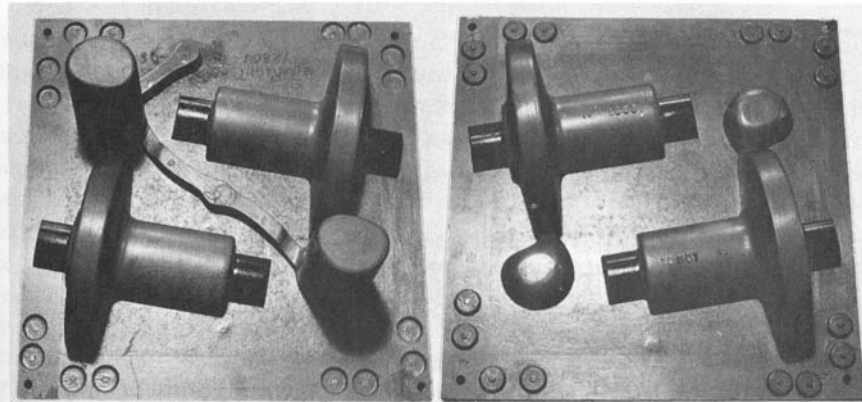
Cope-and-drag pattern for molding two heavy parts: cope section (left) drag section (right).
